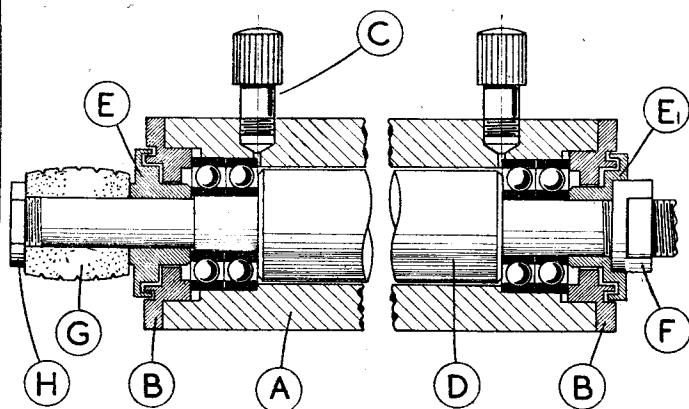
A—the body; B—the bearing caps; C—the lubricators; D—the spindle; E and E.1—the dust excluders; F and H—the spindle collars; G—the pulley
